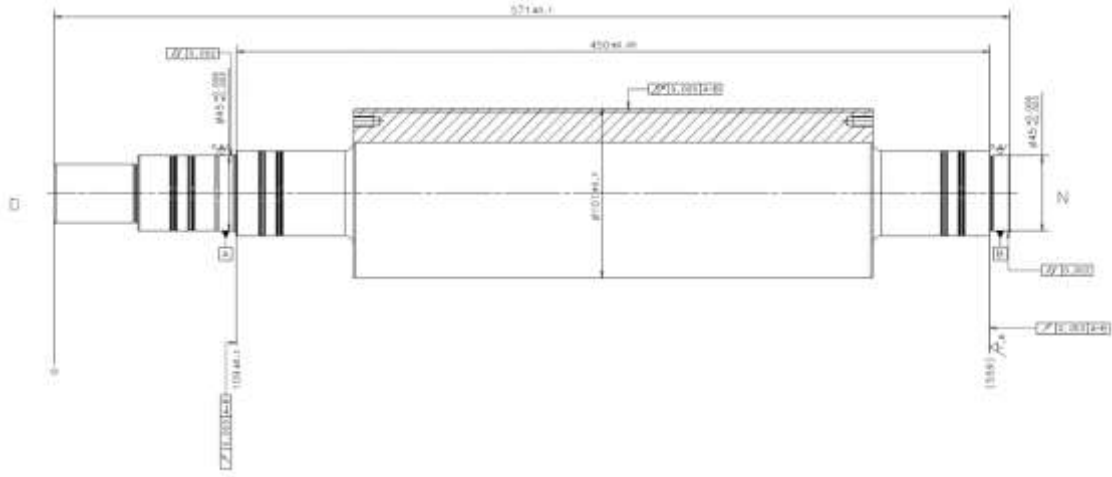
Prototype motor rotor drawing displaying main dimensions and toleranced dimensions of significance.
